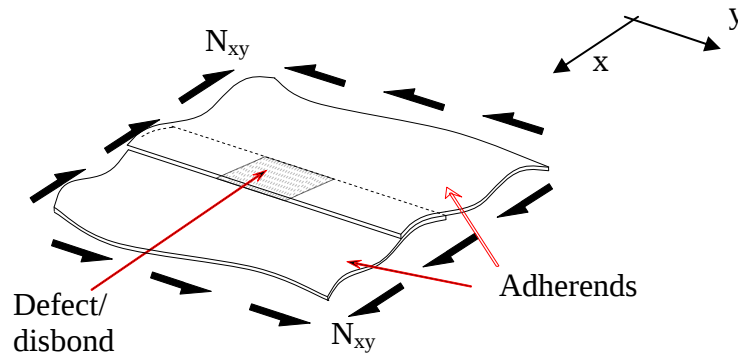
Shear-Loaded, Single-Lap Joint Section With Rectangular Disbond
